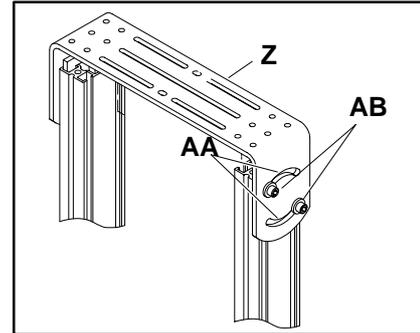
Stand Mounting Bracket for Up to 305 mm Wide Conveyors
